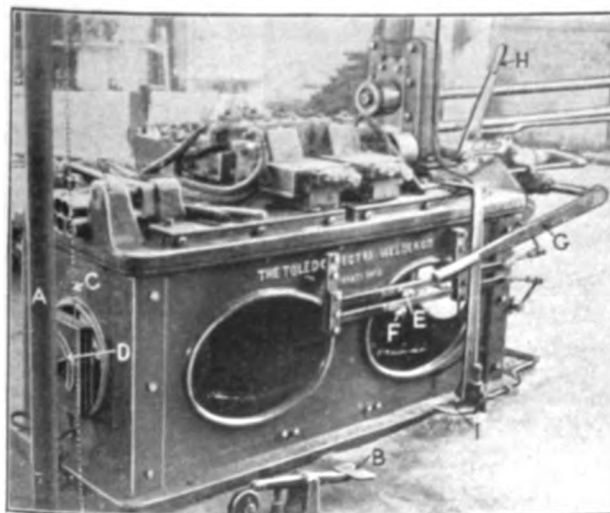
THE OPERATING LEVERS AND FOOT TREADLES
